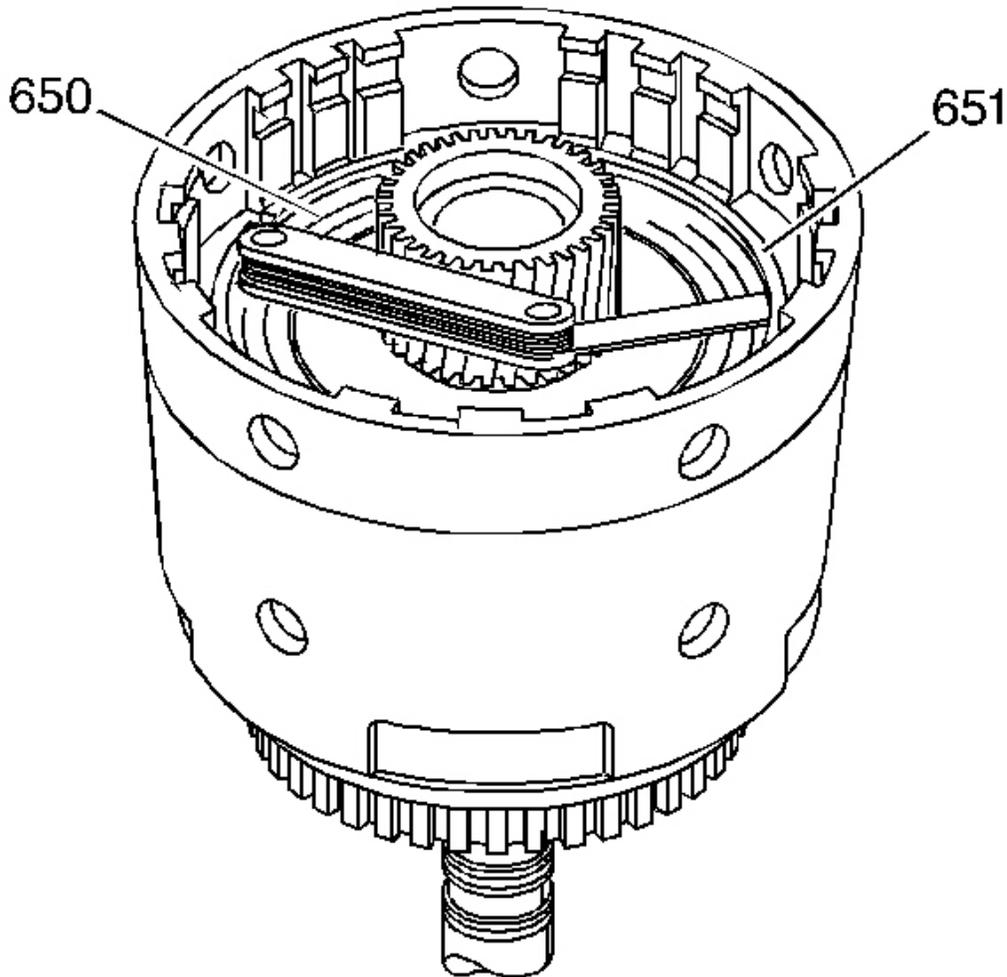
Forward Clutch Backing Plate Retainer Ring & Forward Clutch Selective Backing Plate
